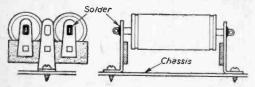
The 8 and 25µF condensers are soldered to tag strips for mounting on the chassis.
